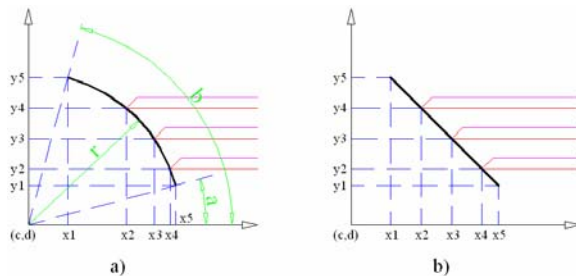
a) Tool paths for arc features, b) Tool paths for tapered surfaces
